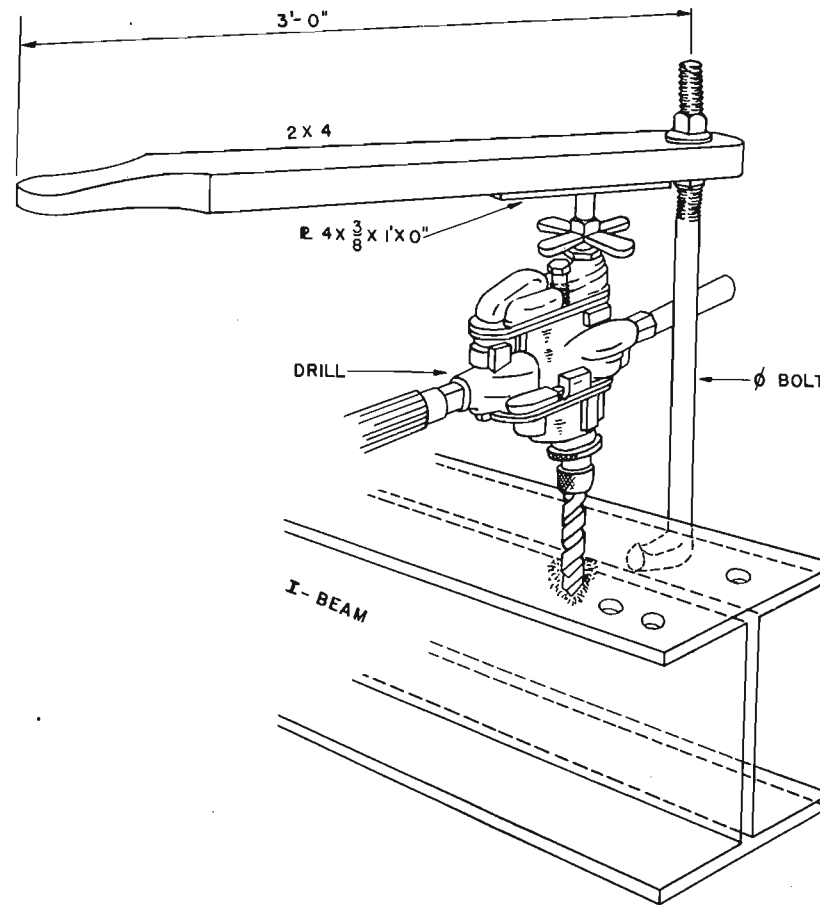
Drill bar used with pneumatic drill. The drill bar is less stable than the "old man" shown in figure 50.
